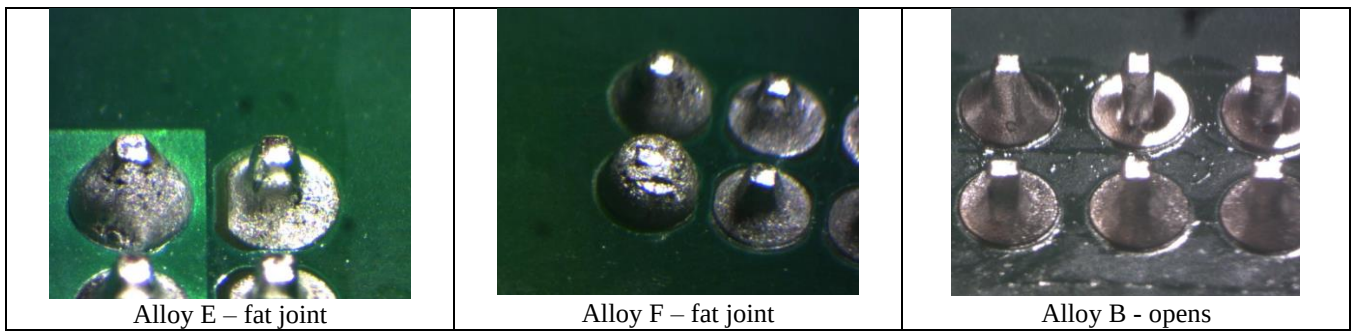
The issues with the 1.27mm for alloy E and F was excessive solder and for alloy B open joints.
